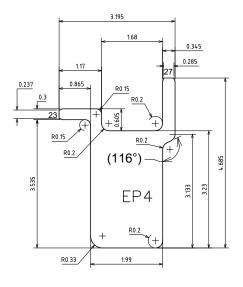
VFQFPN 15 x 7 x 1 mm package dimensions – exposed pads details
